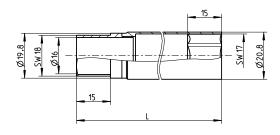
Mounting wrench Type 1300A4... (see accessories)
